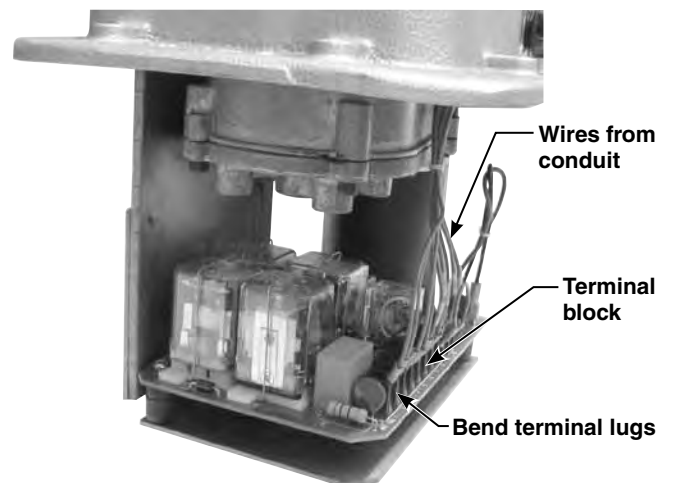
Connect wiring to terminals per the supplier wiring diagram. Train the wires away from the edge of the motor housing to allow clearance between the motor wiring and the motor cover. Bend the terminal wire lugs if necessary.
